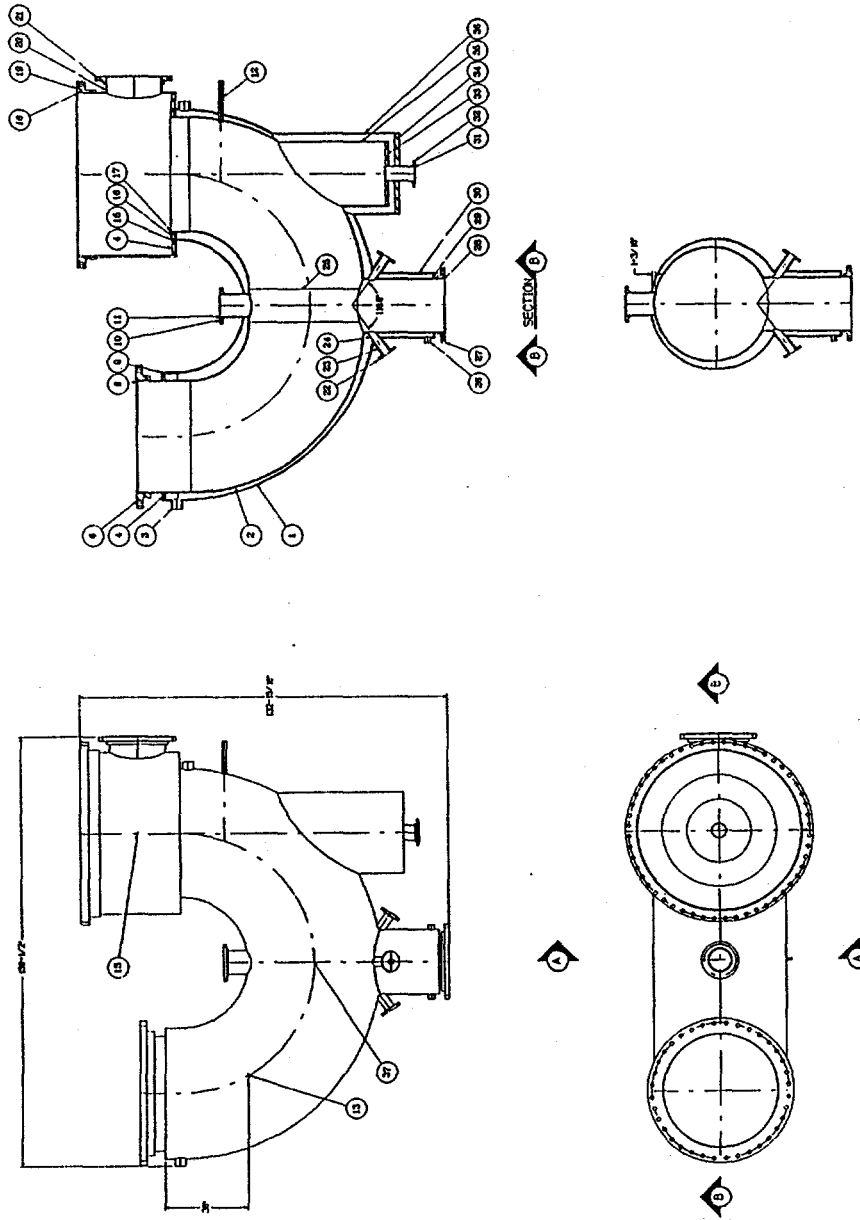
U-BEND SECTION ASSEMBLY (WITHOUT REFRACTORY)
